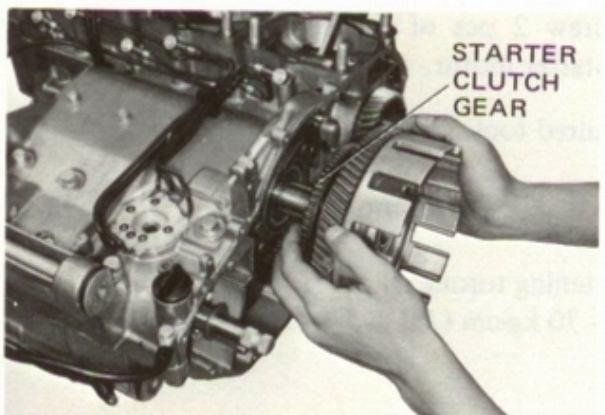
Removing clutch housing and starter one-way clutch
